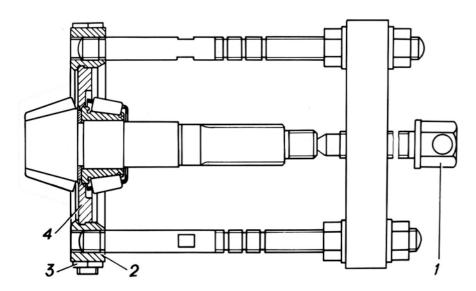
Bearing removal from the final drive gear: 1 – puller screw; 2 – support; 3 – nut; 4 – insert
